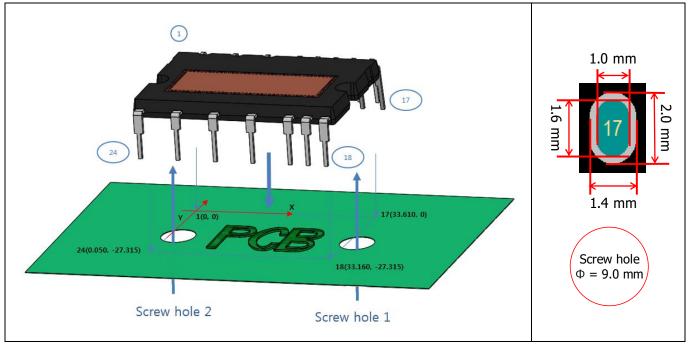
IM828 position on PCB (Unit: [mm]) and example of pad design(1~24pin)
